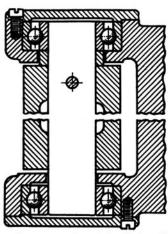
Arm joint designed for accuracy. Upper ball bearing takes all thrust caused by weight, and the spindle is pinned to the stationary member. The bearing has a light press fit.
